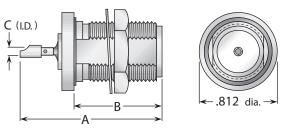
(Rear mount, hermetically sealed, with mounting gasket)
